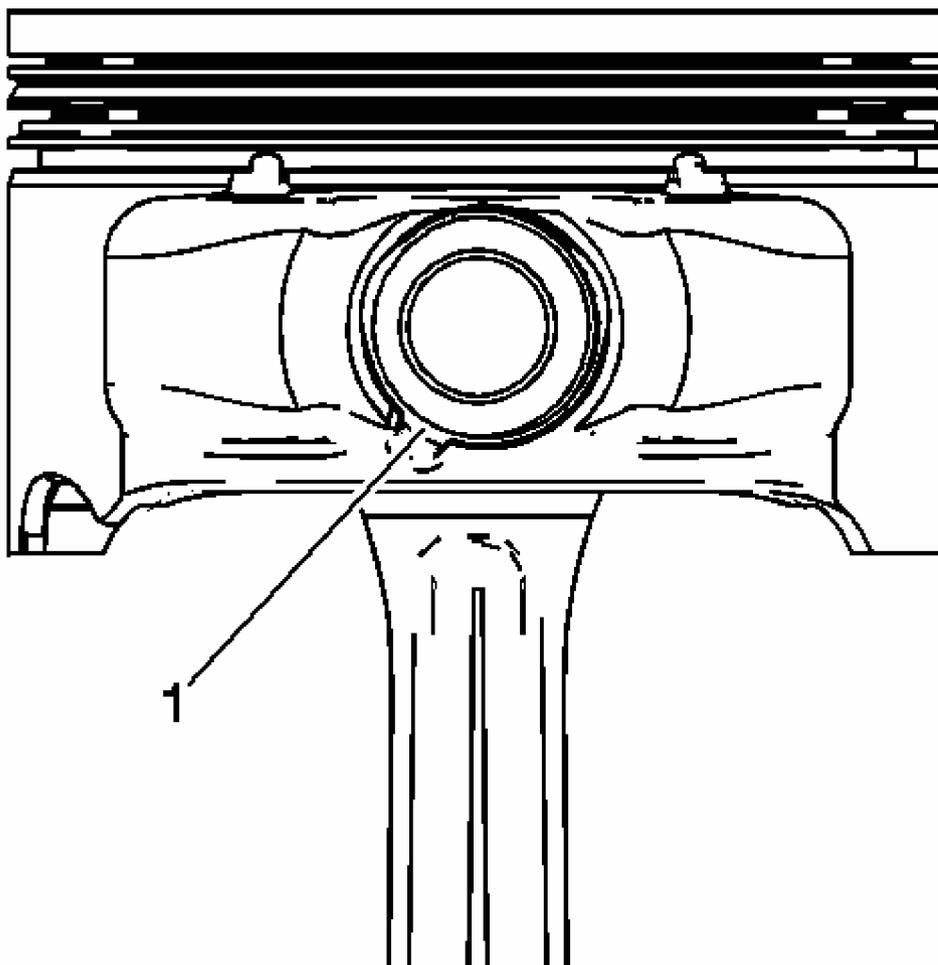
Identifying Piston Pin Retainers Removal Access Notch
